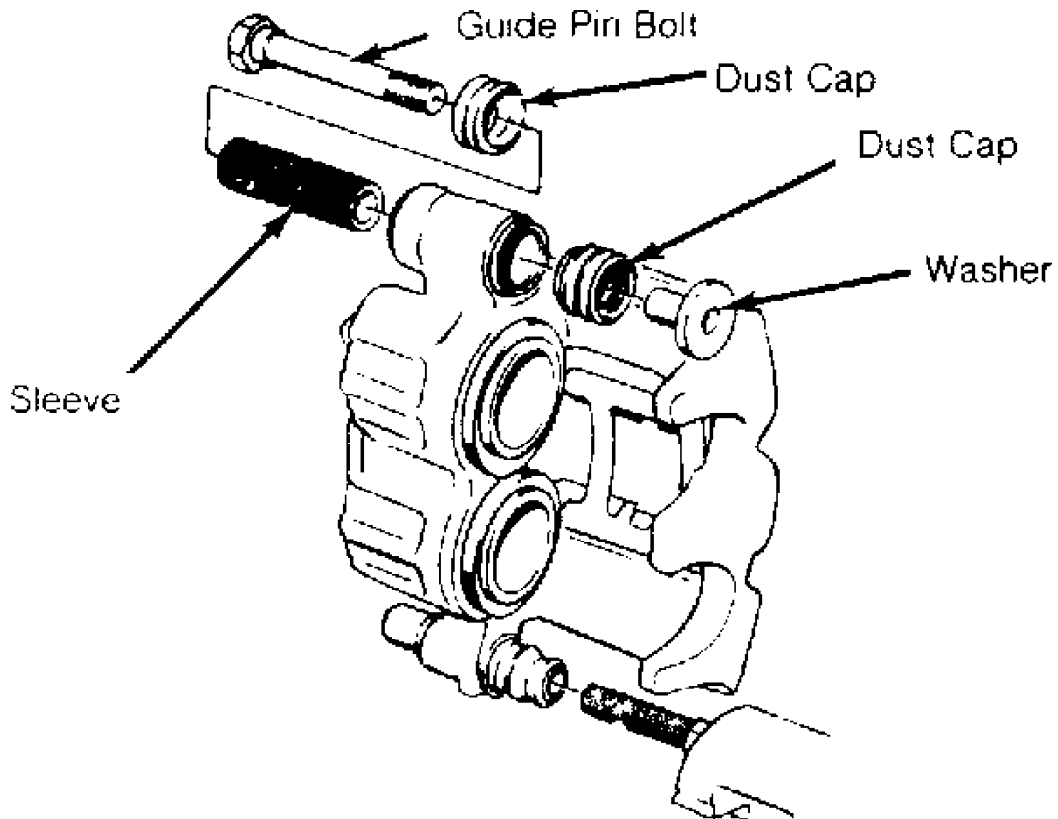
Identifying Bendix (DBA) Front Caliper Components
